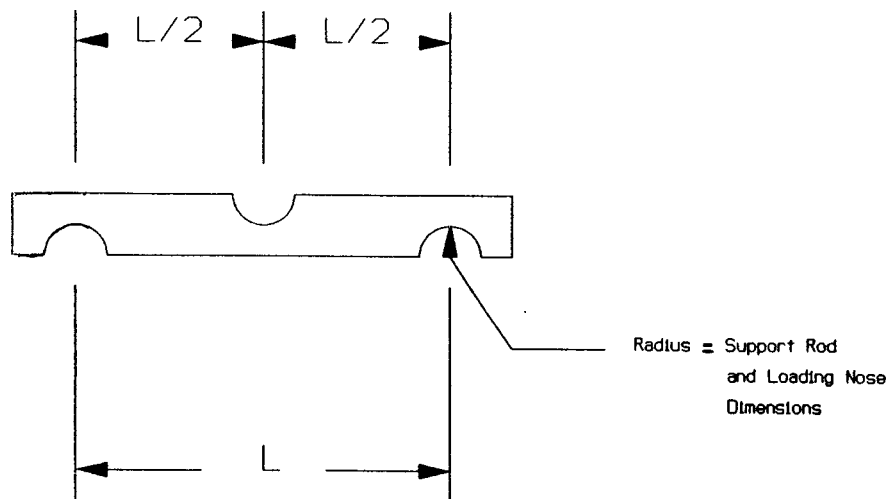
Fixture Used to Set Loading Nose and Support Spacing and Alignment
